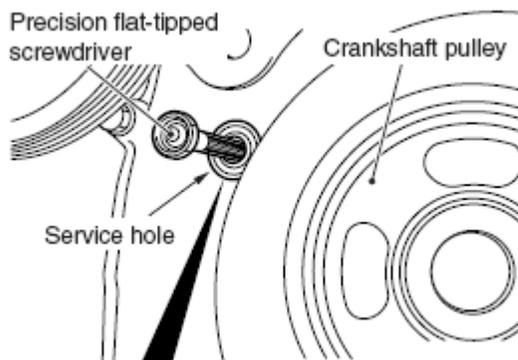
Identifying Service Hole And Crankshaft Pulley
